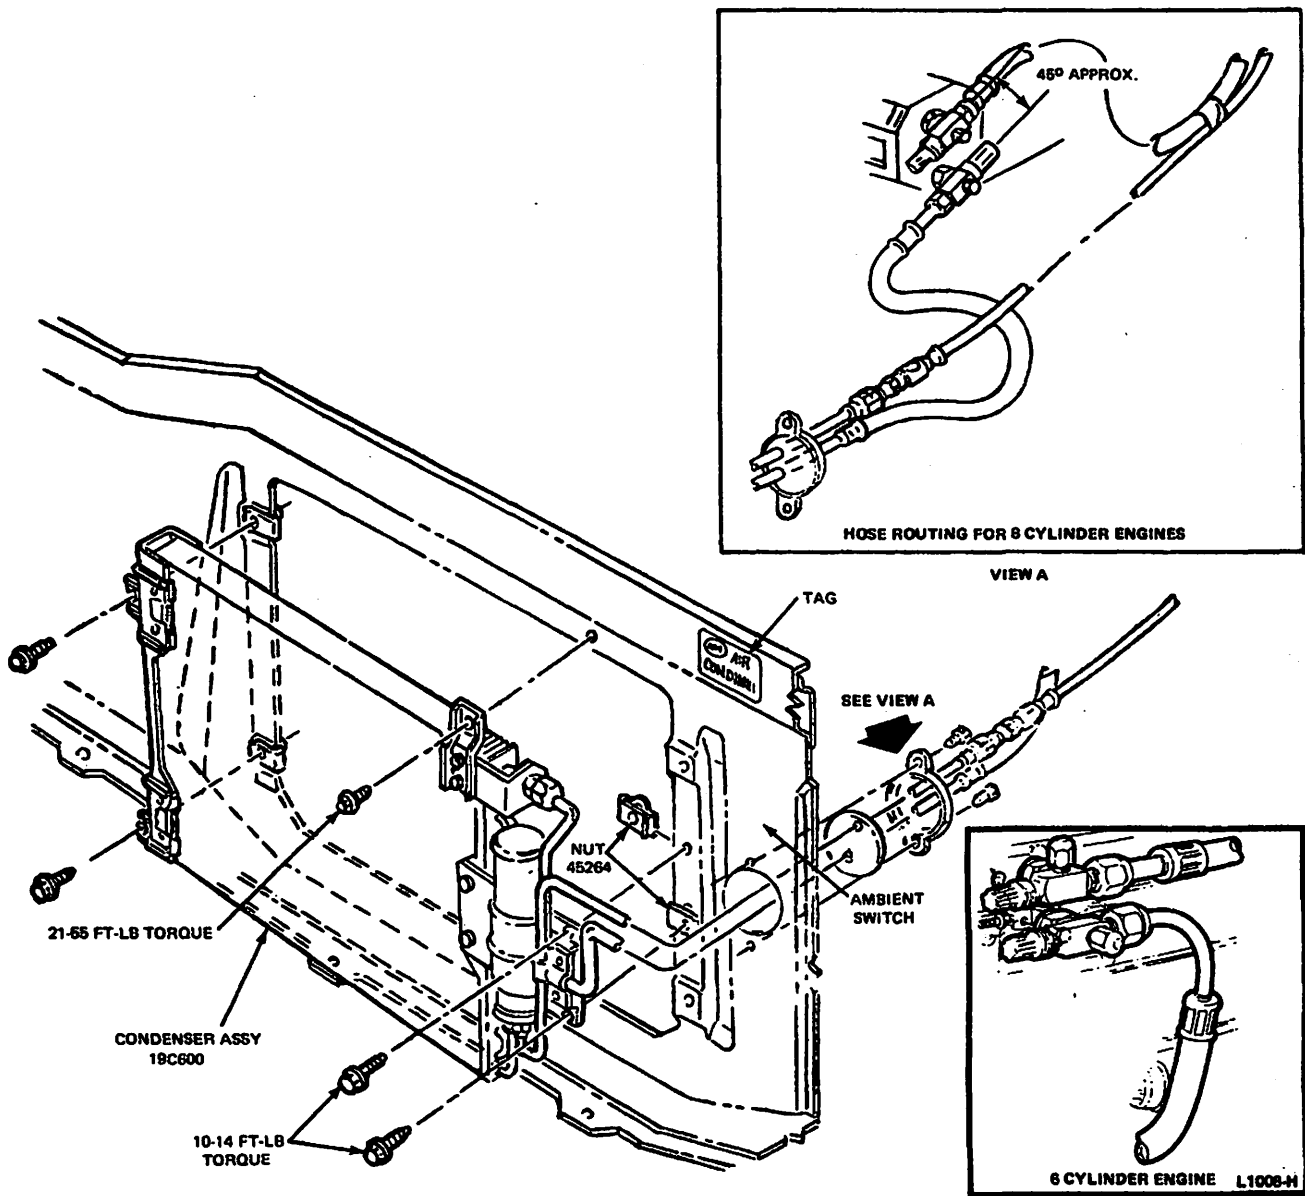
Condenser and Receiver Drier Installation, 635 sq. in. Shown—Typical 505 sq. in.
